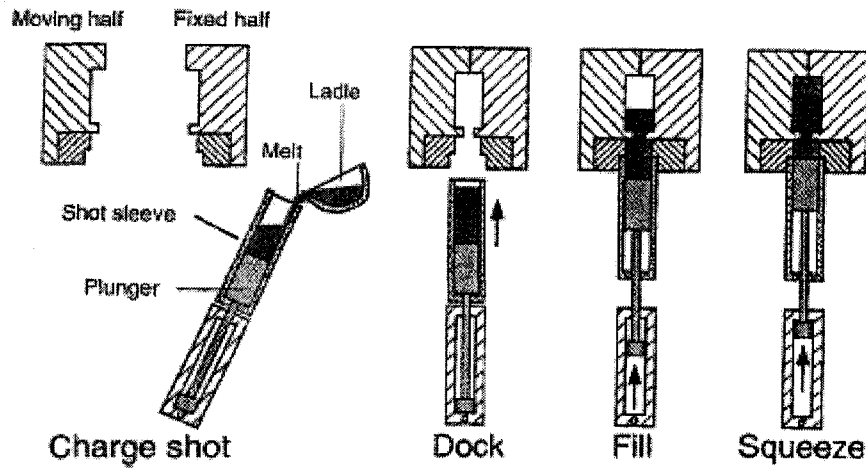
Schematic diagram showing the operation of a typical vertical injection indirect squeeze casting machine [4].
